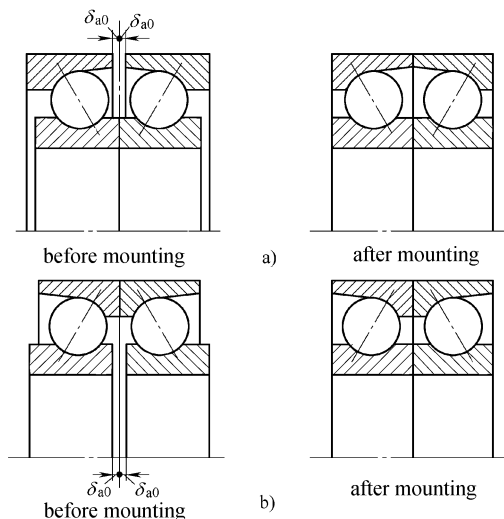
Matched pair angular contact ball bearings preloading mounting
